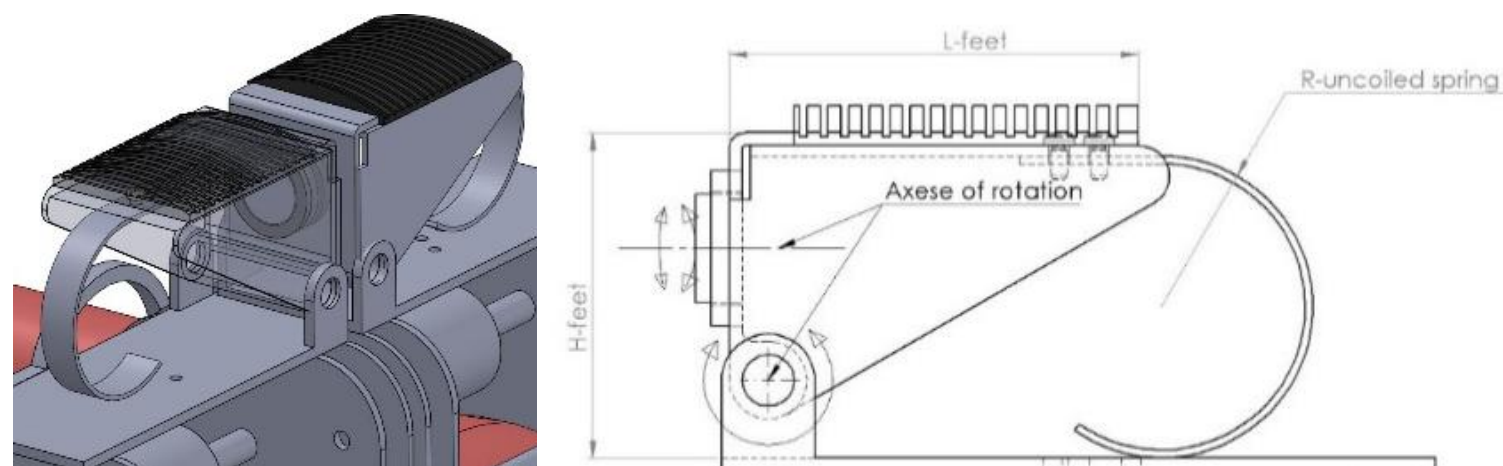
Gripper attached to 3-dof universal joint between two modules and variable dimensions
